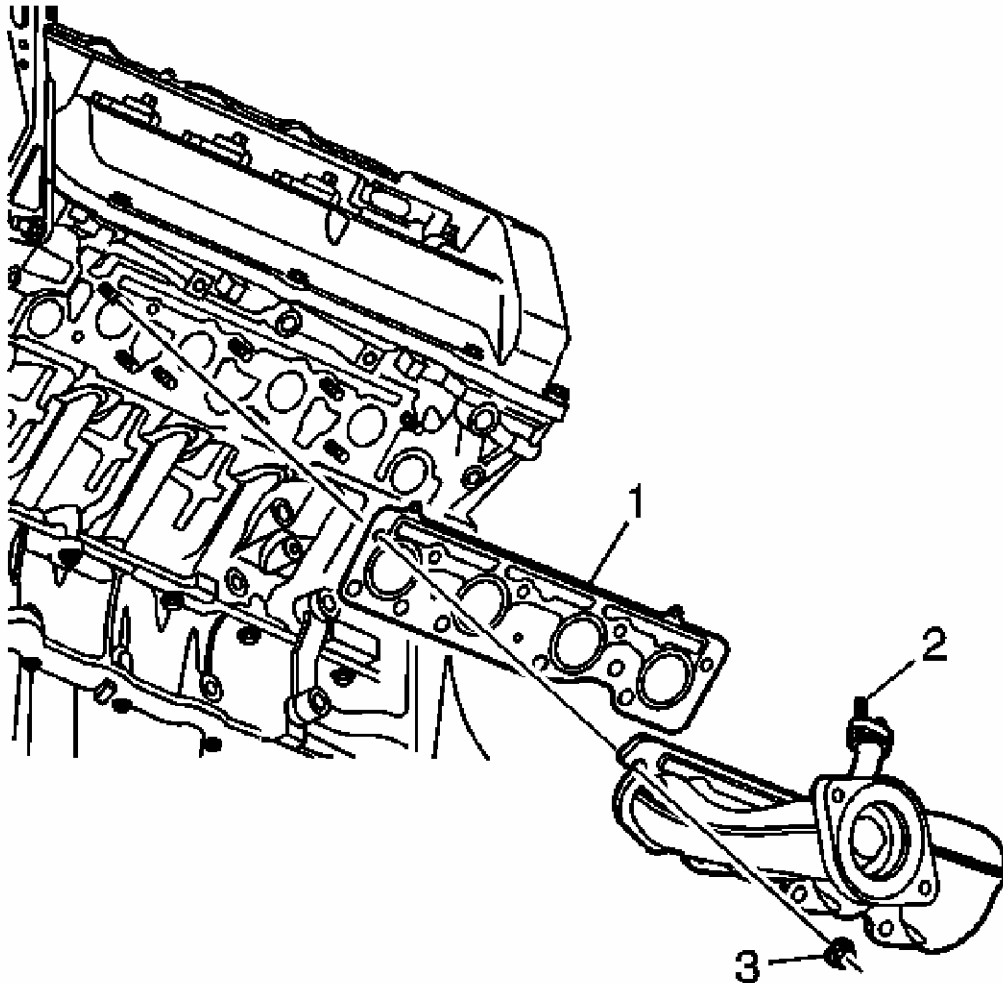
Identifying Right Exhaust Manifold Retaining Nuts
